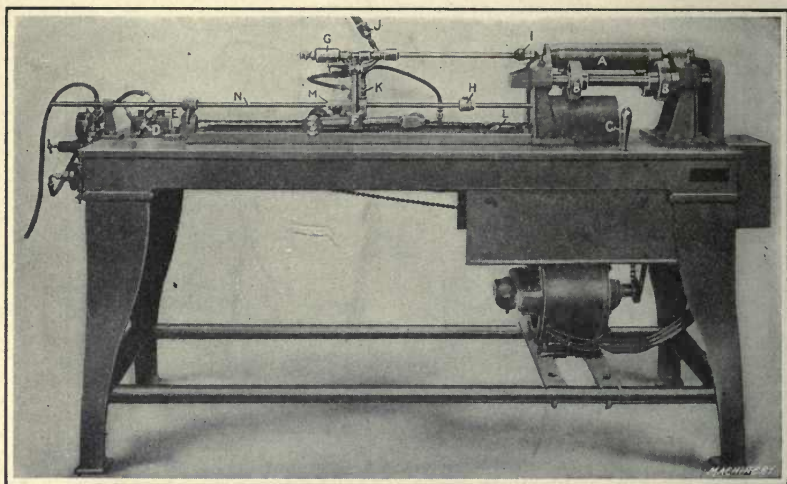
De Vilbiss Spraying Machine for coating Interior of High-explosive Shells
